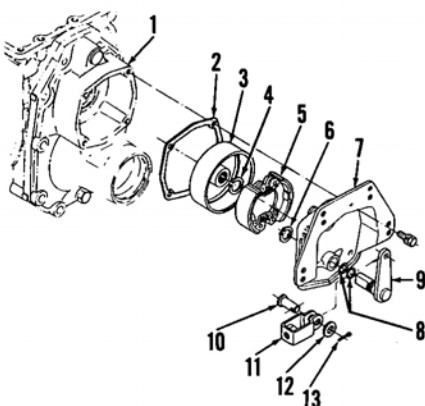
Exploded view of brake assembly used on Models B6100D, B6100E, B6100HST-D, B6100HST-E, B7100D, B7100HST-D and B7100HST-E.
